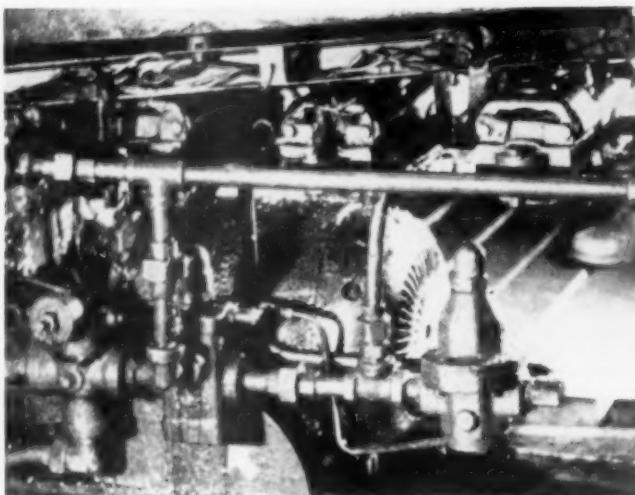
Above is a machine to counterbore valve seats. Note unprotected wiring; inaccessible piping and controls.
